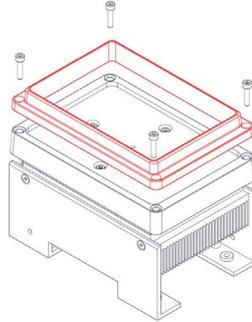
· Unscrew the 4 screws at the corner and remove mounting frame
